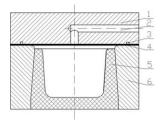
Schematic diagram of superplastic forming Ti–6Al–4V deep cylinder with ceramic die. (1) Blank holder; (2) air inlet hole; (3) blank slot; (4) Ti–6Al–4V sheet; (5) ceramic die: (6) female die.
